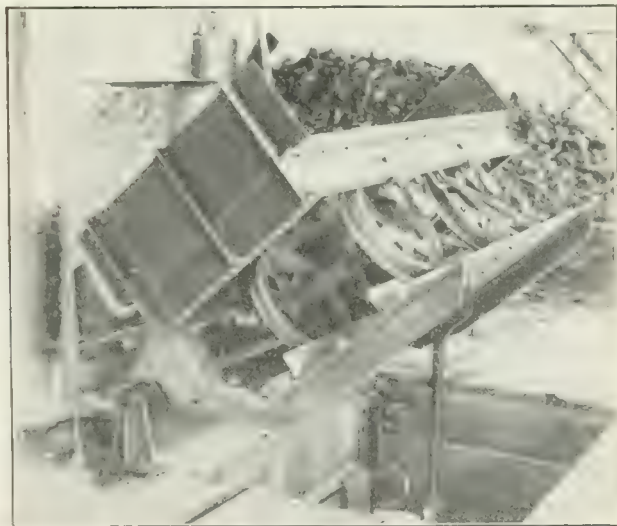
A Whiting Cupola Dumping Charging Machine for Large Cupolas.
